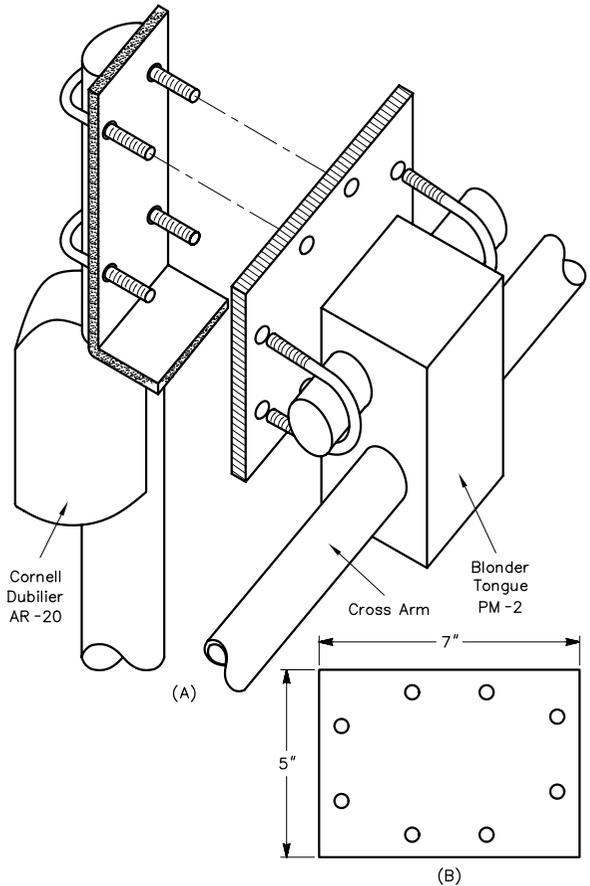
The method of mounting two rotators together. A pair of PM-2 rotators may also be used. The adapter plate (B) may be fabricated from $1/4$ -inch thick aluminum stock, or a ready made plate is available from Blonder-Tongue.
